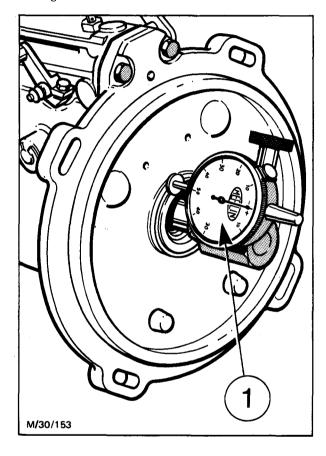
Measuring Camshaft End Float (York Pump Shown) 1. Dial Gauge
